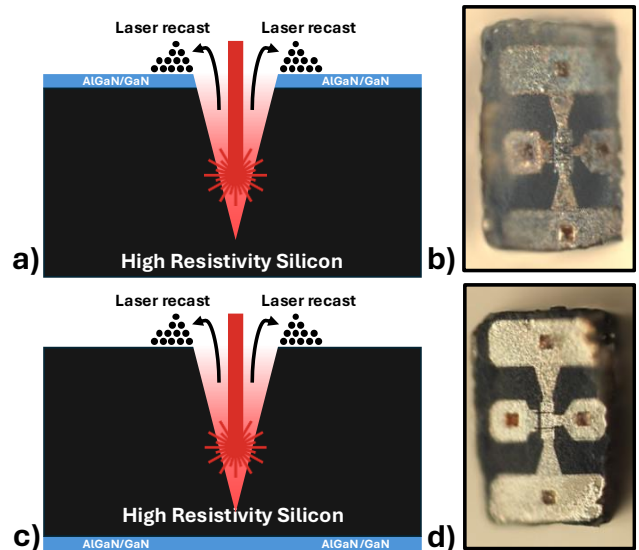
Femtosecond laser dicing approaches. (a) Front side laser dicing scheme. (b) Dielet fabricated using front side dicing approach with significant laser debris on front side of sample. (c) Backside laser dicing scheme. (d) Dielet fabricated using backside dicing approach with minimal laser debris on front side of sample.
